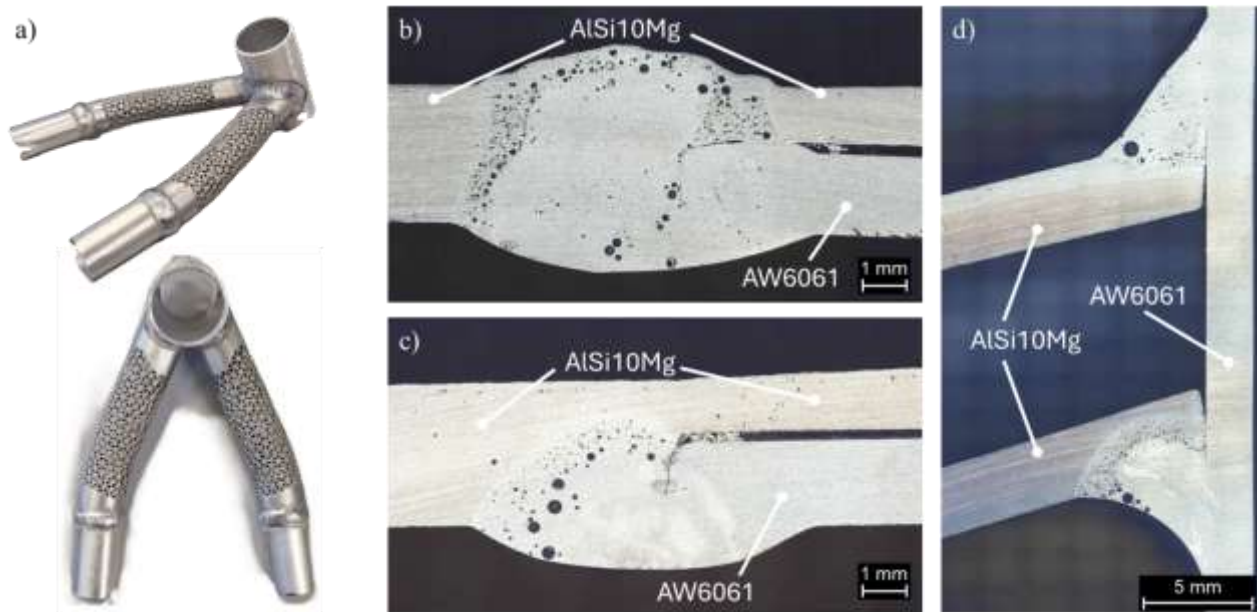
(a) Prototypes used to assess weldability between LPBF AlSi10Mg components and AW6061 tubes; metallographic cross-sections of the weld bead produced using (b) continuous GTAW, (c) pulsed GTAW at 80 Hz and (d) pulsed GTAW at 100 Hz.
